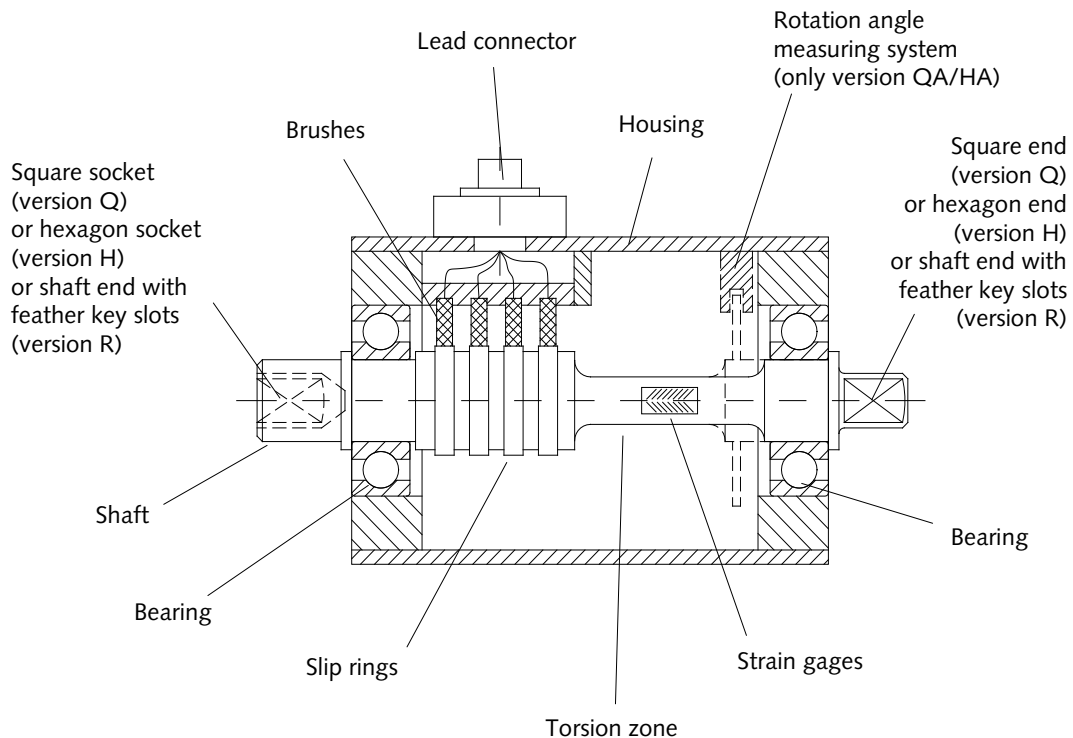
Mechanical design rotating torque sensor Type 4501A...
